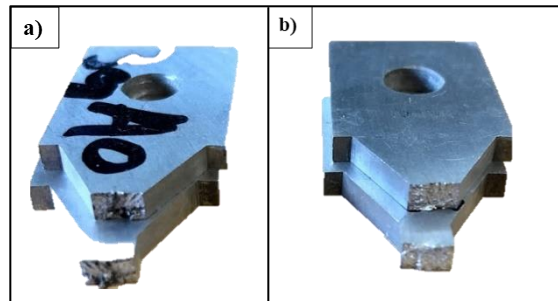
Fractured fatigue specimens after testing. a) Defected specimen and b) defects-free specimen.
